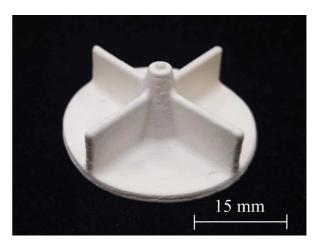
Sintered 3Y-TZP/mullite composite rotor manufactured by UV-casting replication
